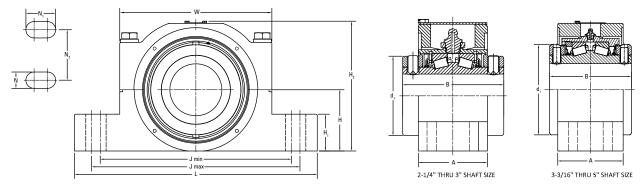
Type E Self-Aligning Mounted Tapered Roller Bearing nomenclature.
